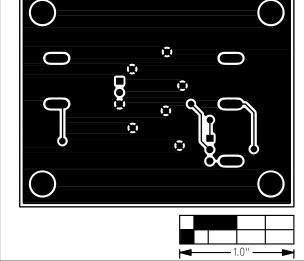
MAX6470 EV Kit PC Board Layout—Solder Side
